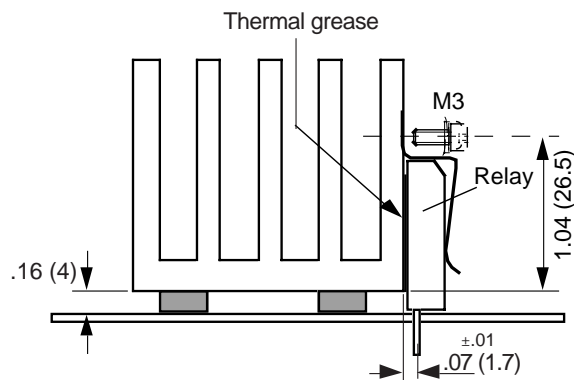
Mounting with L 19100 clip; dimensions in inches (mm)
